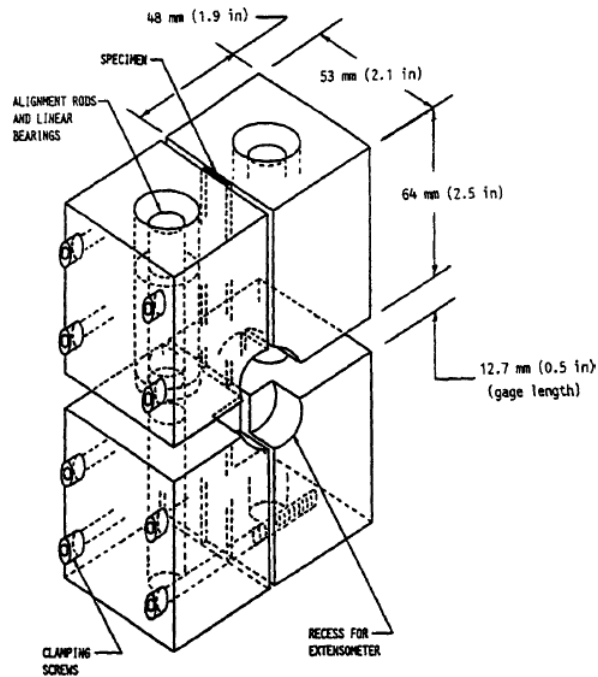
Combined loading compression (CLC) test fixture, ASTM D6641 [70].
